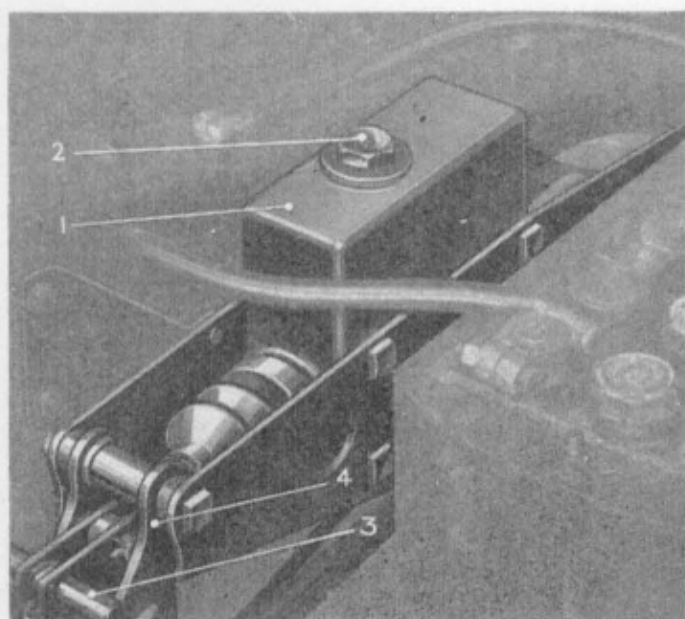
THE HYDRAULIC MASTER CYLINDER AND RESERVOIR.
